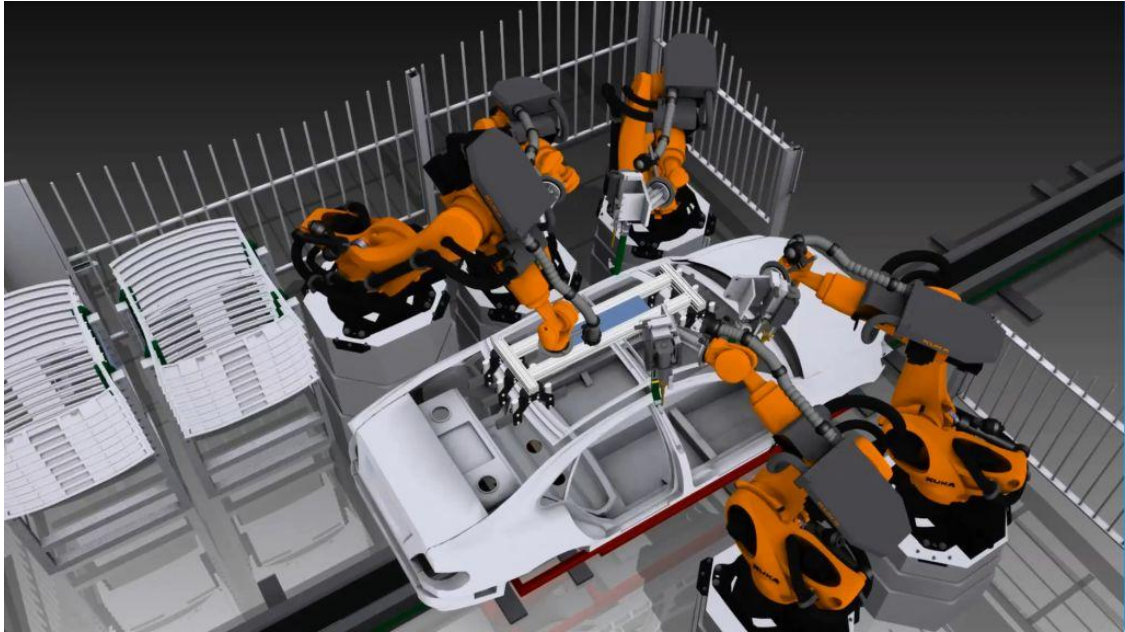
3D world: Robots doing spot welding to a car.
